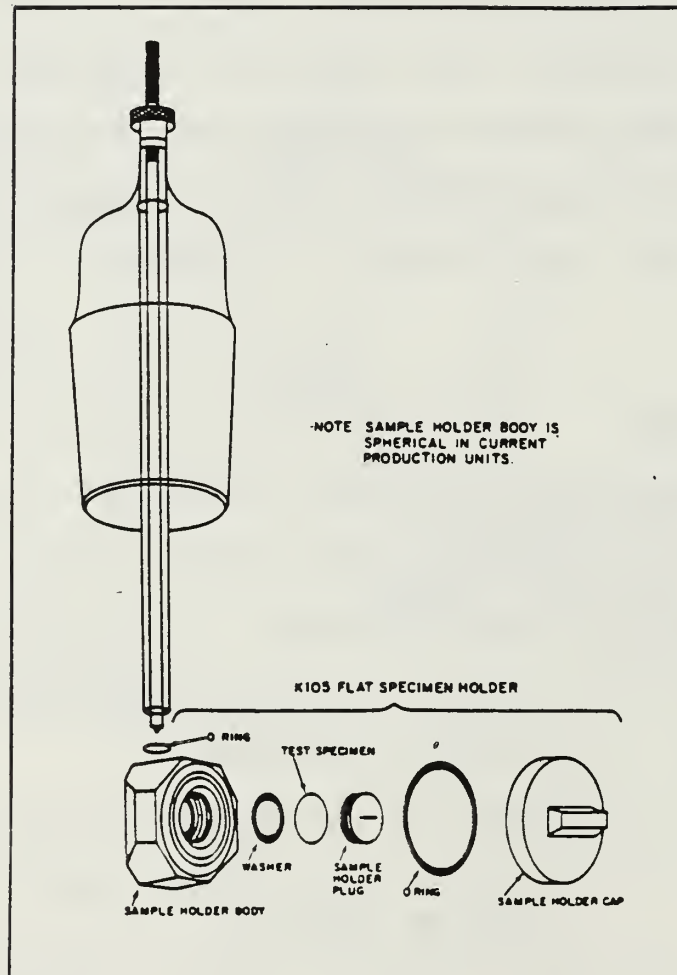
Exploded View of the Model K105 Flat Specimen Holder
